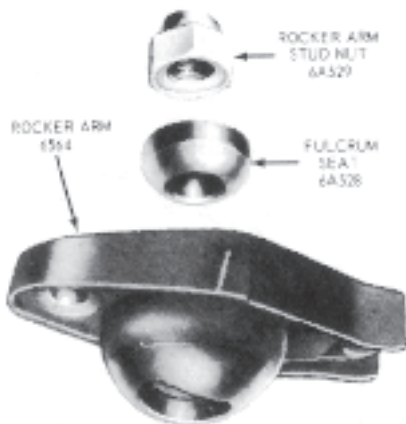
Valve Rocker Arm-302 and 351-W Engines
